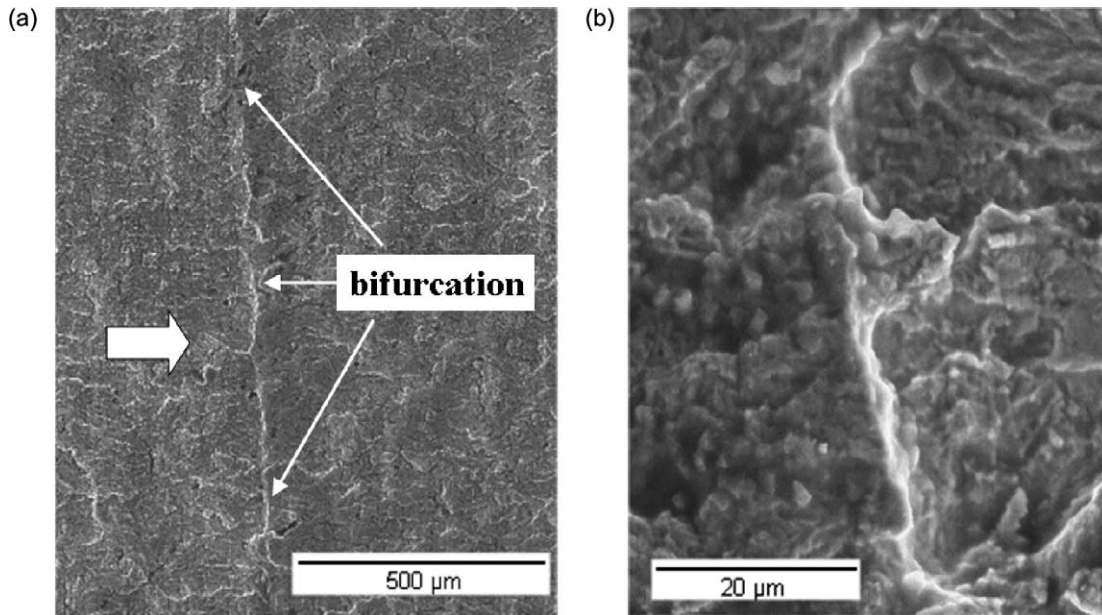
Scanning electron micrographs of fracture surfaces (test III): (a) bifurcation front through the specimen thickness, and (b) detailed view indicating different height levels.
